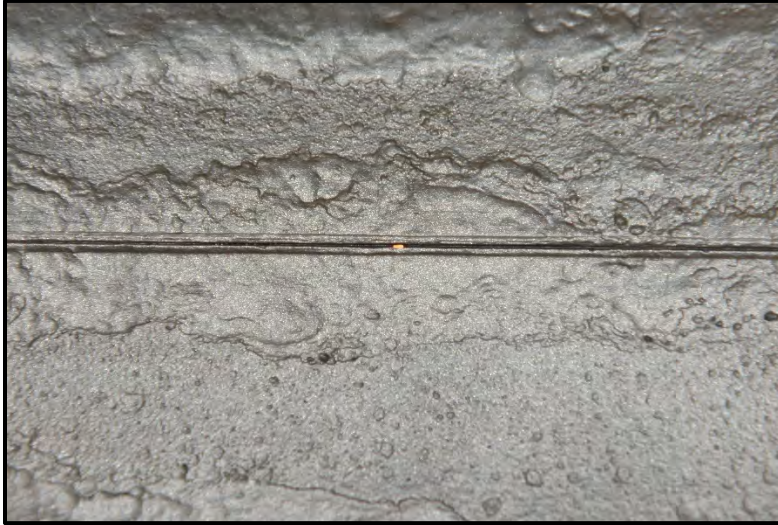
Weld Seam Corrosion of 4" Galvanized Main
